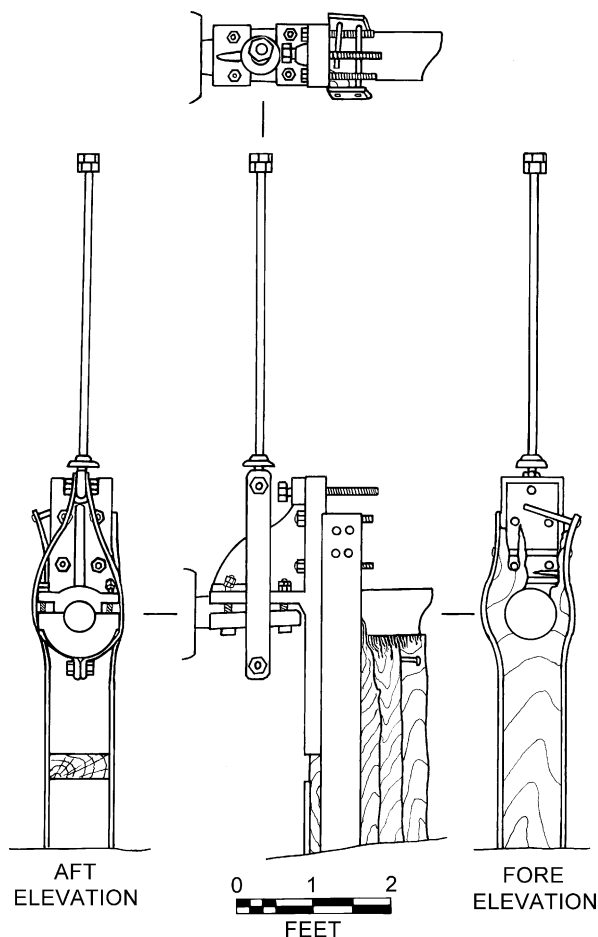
Plan, starboard elevation, fore and aft views of adjustable stern bearing assembly. Drawing by Jim Bradford
